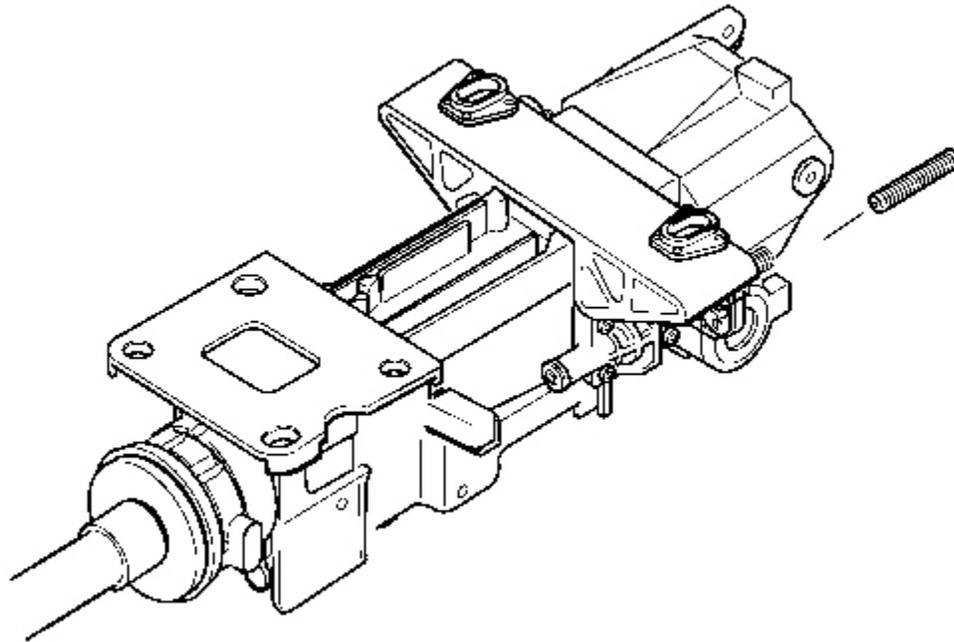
View Of Tilt Head Assembly, Steering Column Support Assembly & Steering Shaft (Power Tilt/Telescope, Floor Shift)
